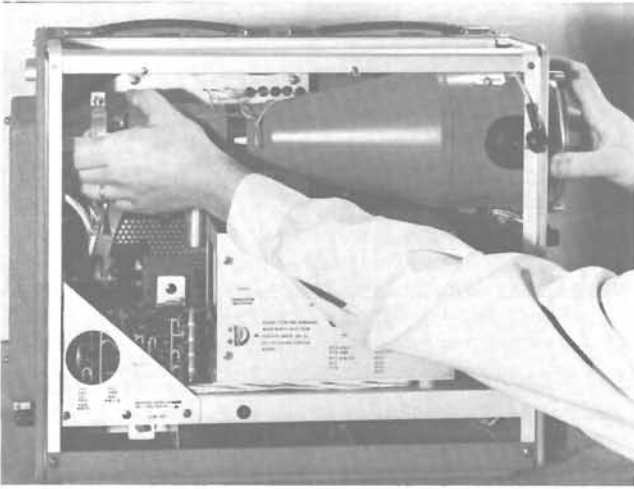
The method used to remove or replace the cathode-ray tube.
